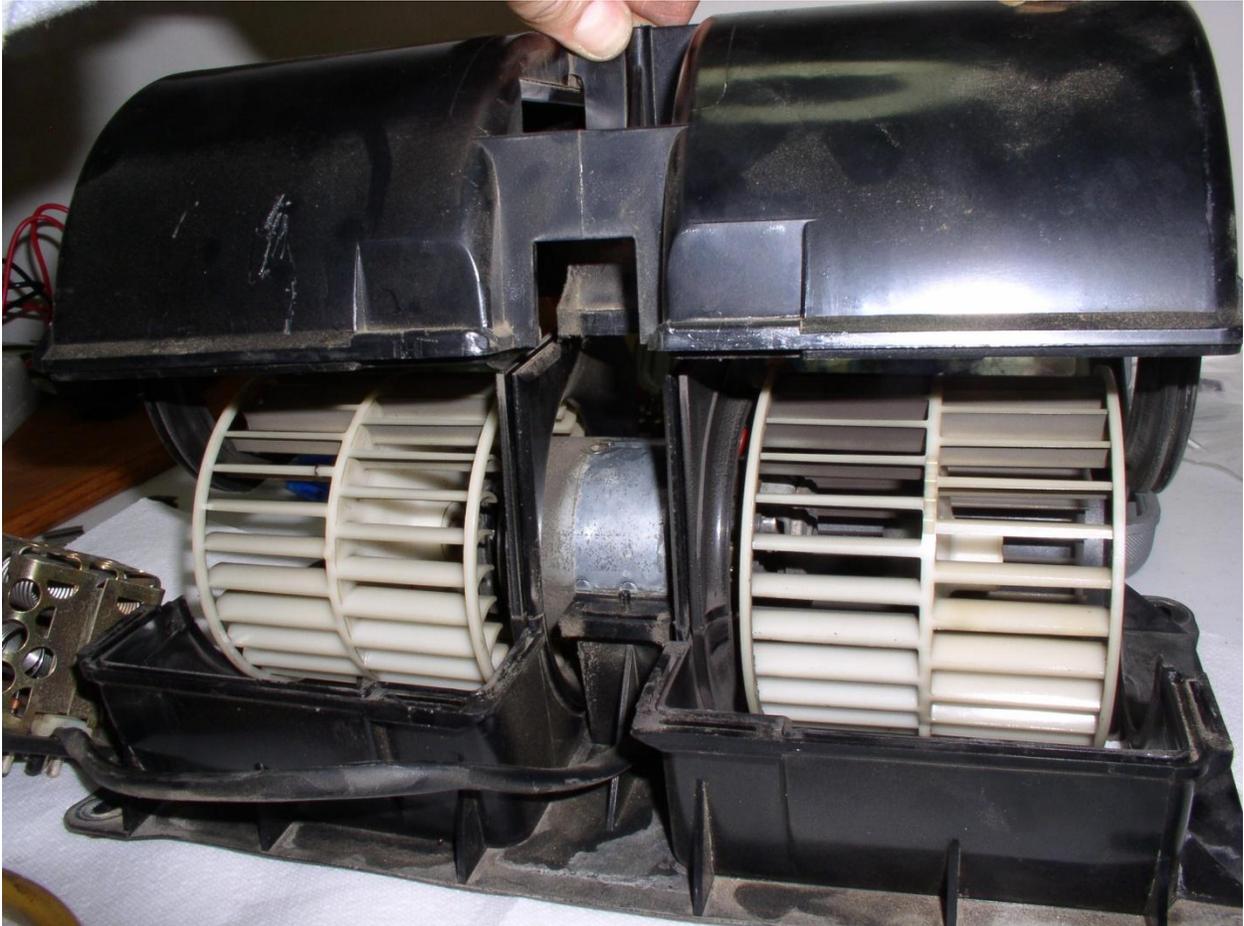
Separating the halves of the heater blower unit. Air intake guides (4) will either stick to the top or bottom half.
